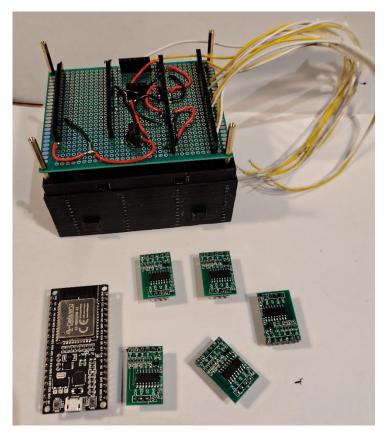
PCB in place, with components ready to insert (Mk.4)
